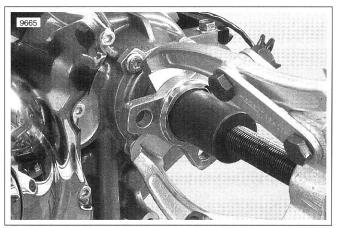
Output Shaft Nut Lock Ring -Engine Assembled
